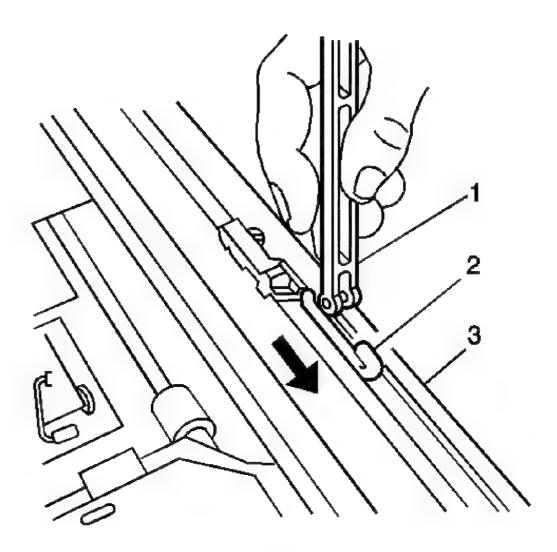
View of Air Deflector, Sunroof Module, & Side Hooks Courtesy of GENERAL MOTORS CORP.
